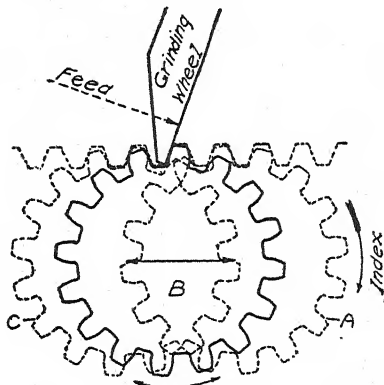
The Wheel of the Lees-Bradner No. 10 Gear Tooth Grinder Shown Operating as the Face of the Tooth of an Imaginary Rack.
